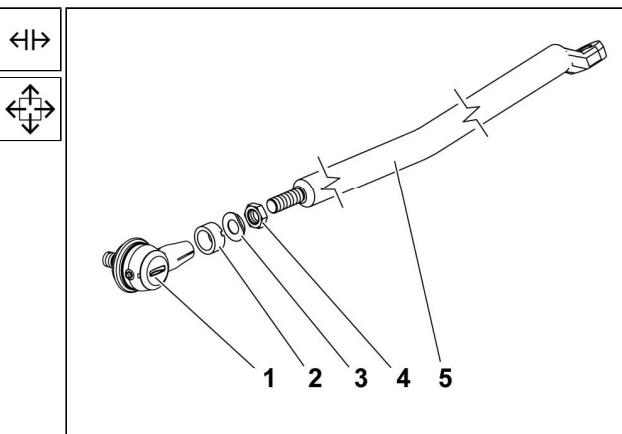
Power cylinder pull rod with joint - dismantling
